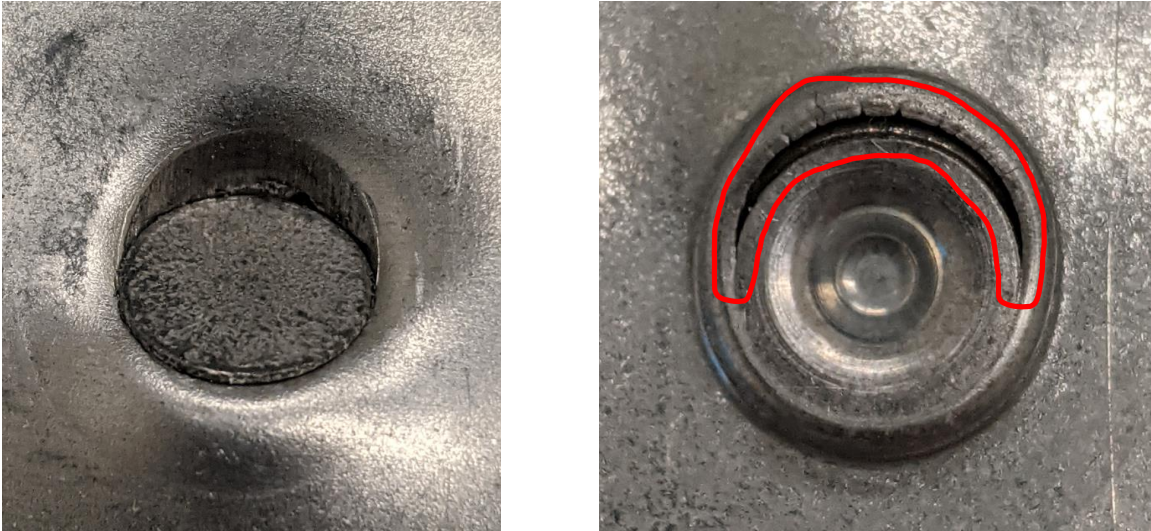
Al 6016 1mm by DX54D 0.95mm SPR cross-tension post quasistatic test 90° pierced Al 6016 sheet (left) and clenched DX54D sheet (right) SPR local damage details
